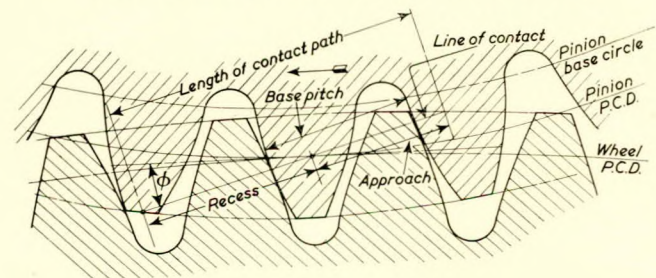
$6/10$ -in. \times 16-deg. tooth form (modified addendum); 40-tooth pinion engaging with 122-tooth wheel drawn in the circular plane
